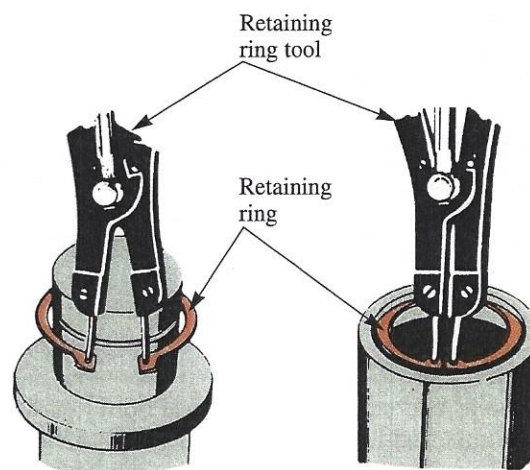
A special plier-like tool is required to install some retaining rings. Nibs are inserted in holes in ring to expand or close ring.
